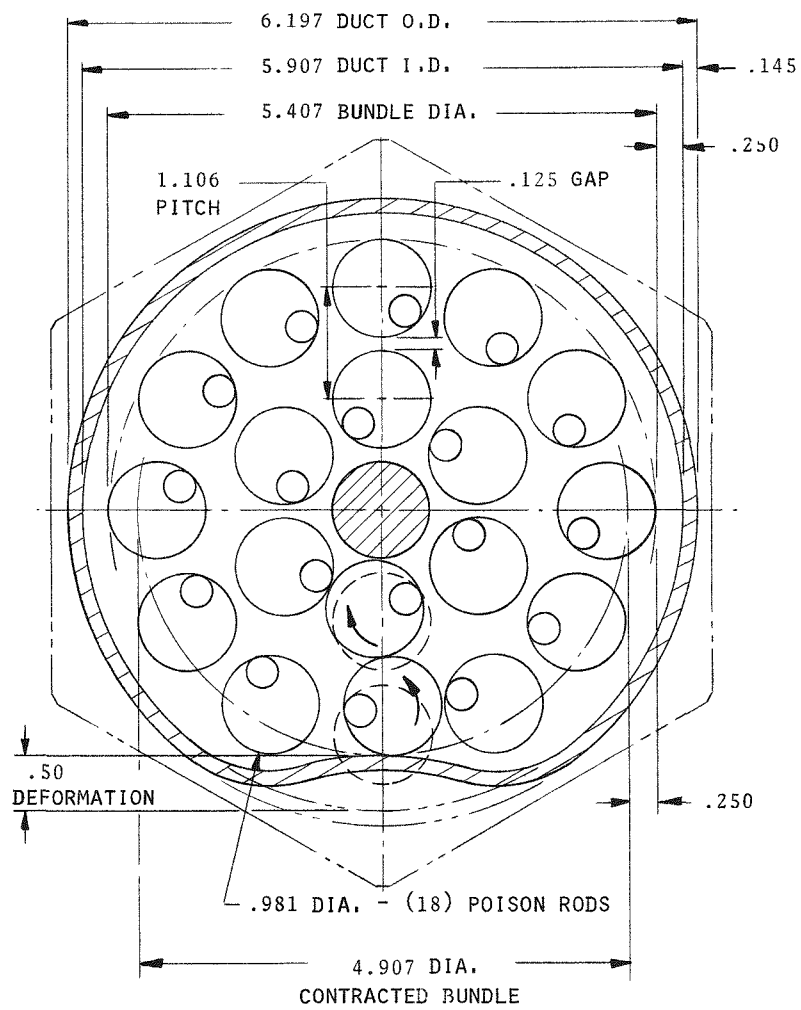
TORSIONAL CONTRACTING CONCEPT PLAN
